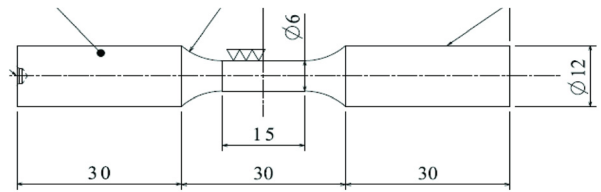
Configuration for rotary bending fatigue test specimen (unit; mm)
